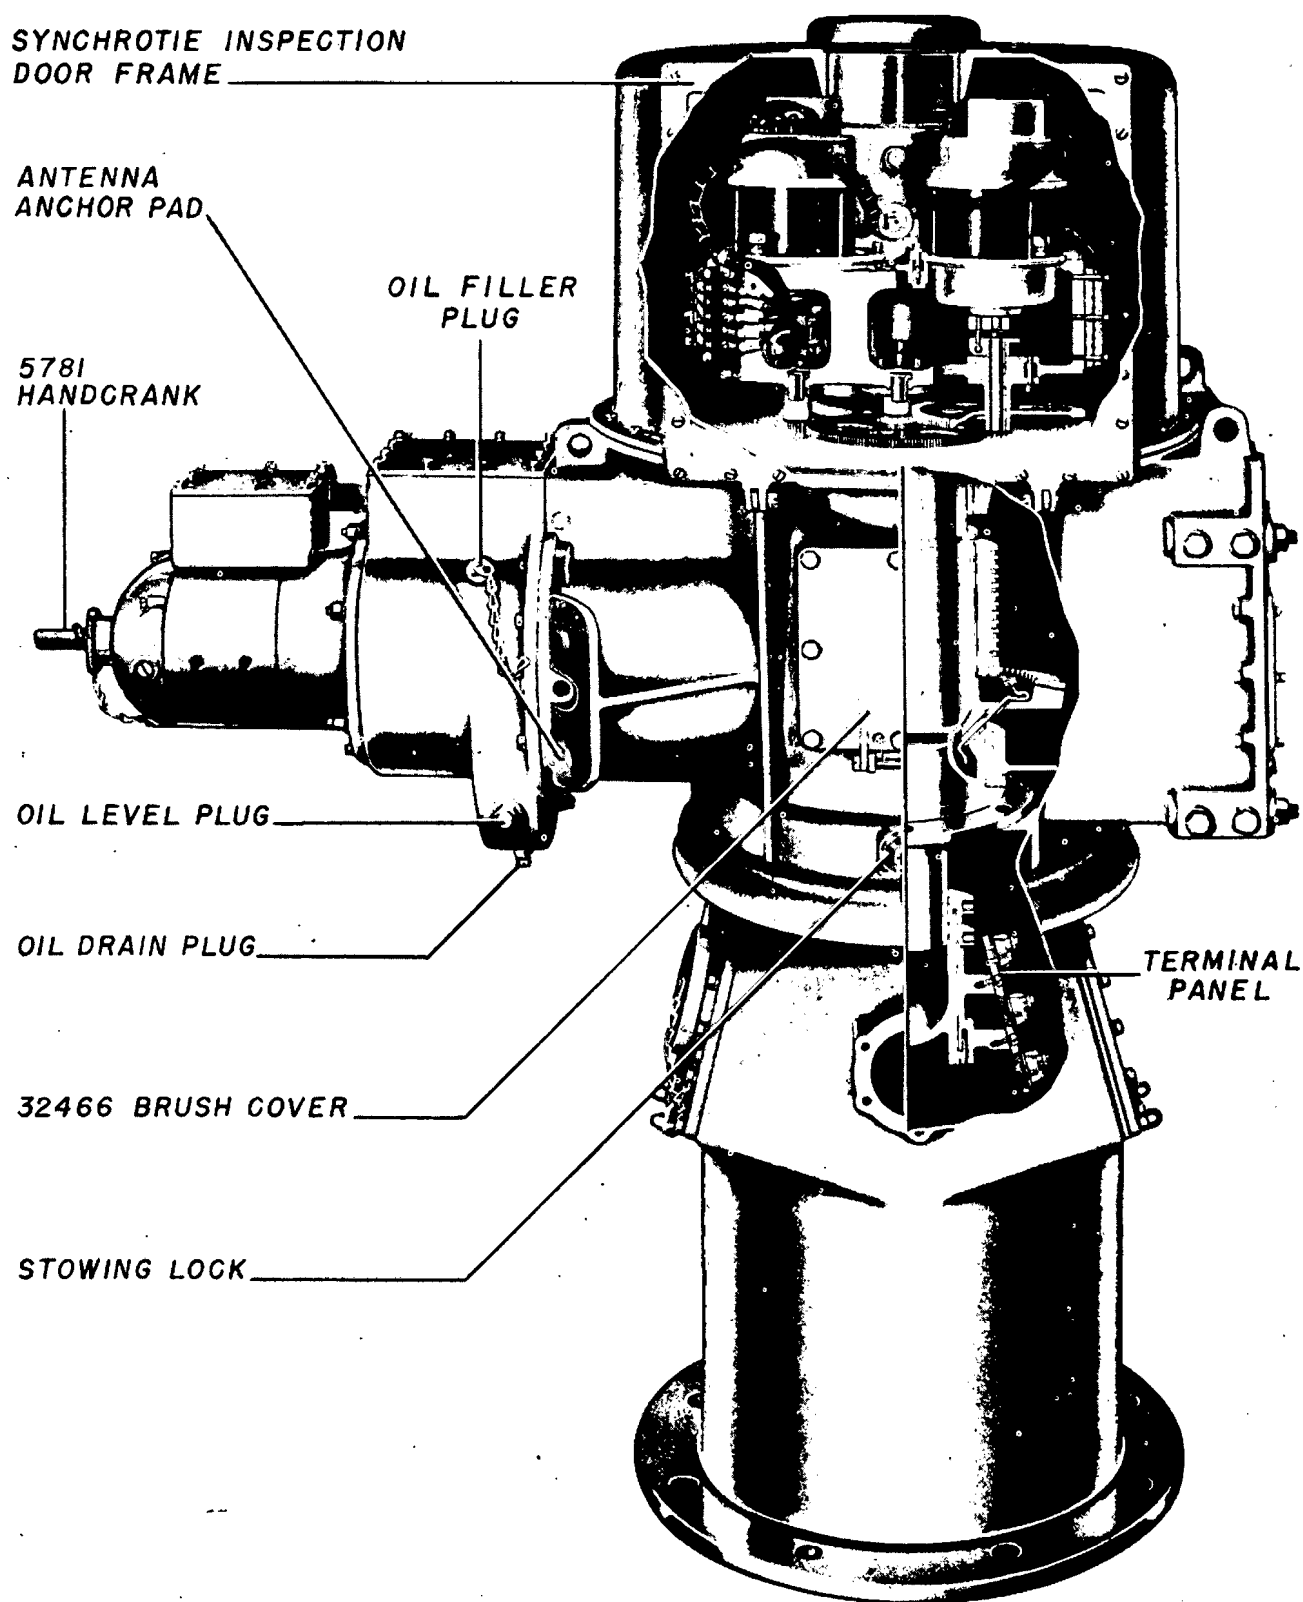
Antenna Pedestal, Showing Synchro Inspection Door
